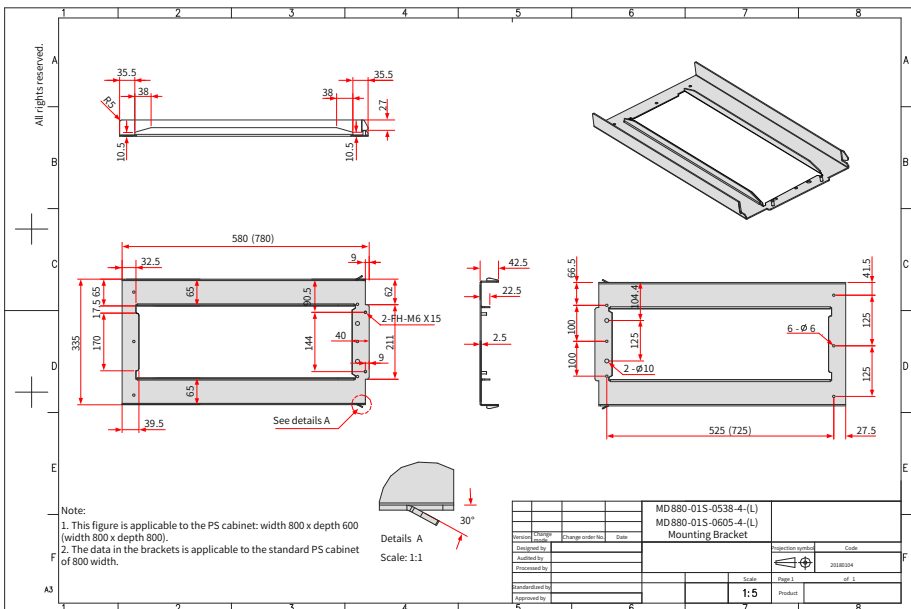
Mounting bracket dimensions of MD880-01S-0538-4-(L)/ MD880-01S-0605-4-(L) (standard)
